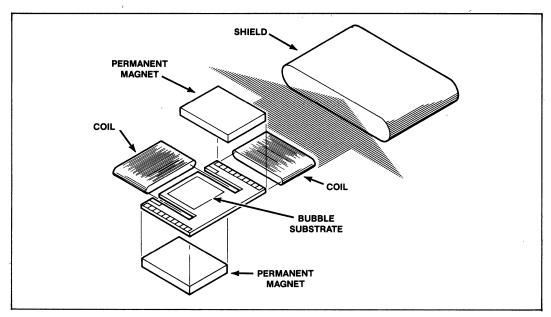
Magnetic Bubble Unit Assembly—Exploded View
